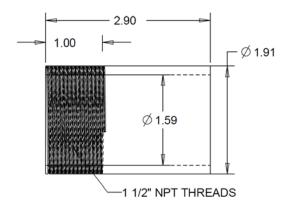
Dimensioned Drawing of the Pipe Nipple
